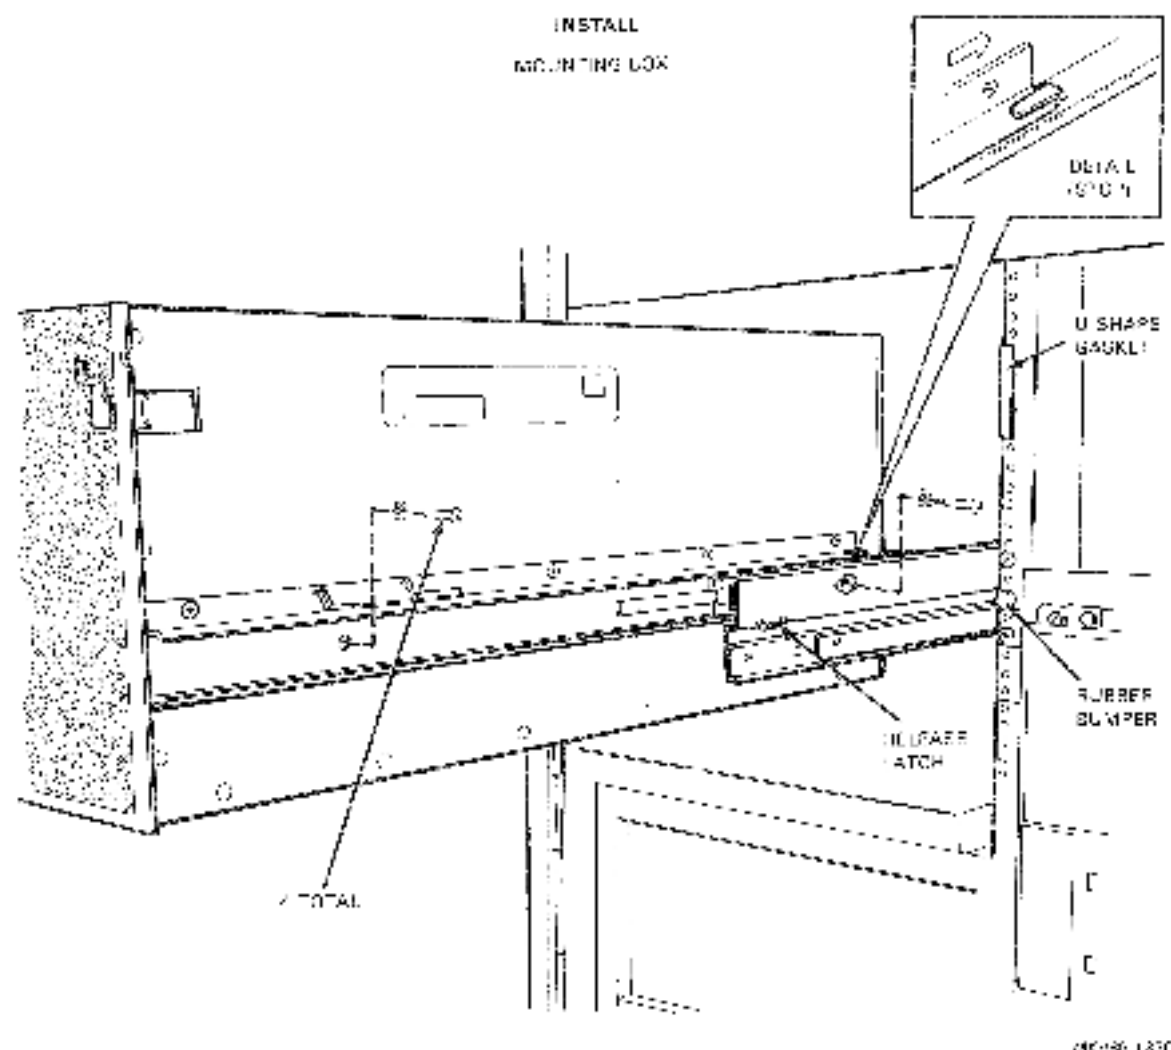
Mounting Box Installation Within an IT9652 Cabinet (Sheet 3 of 3)
